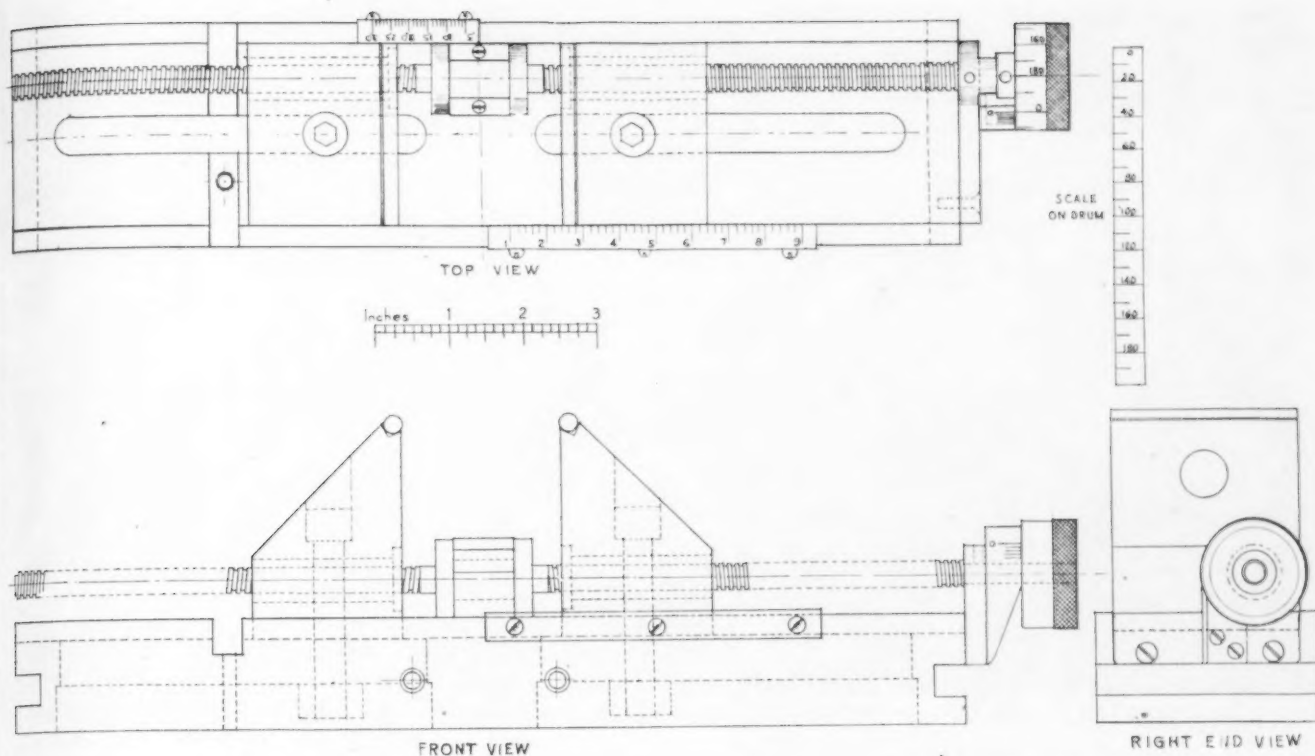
Assembly Drawing of Variable-Span Flexure Test Jig with $\frac{1}{8}$ -in. Radius Supports.
